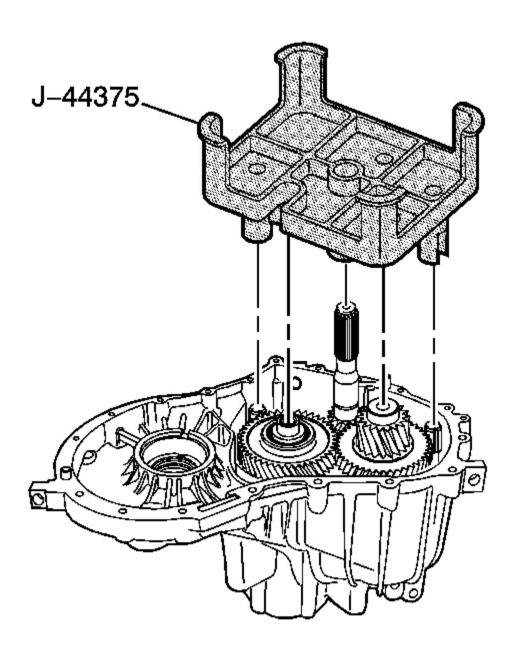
Gear Shafts, Shift Forks & J 44375 Courtesy of GENERAL MOTORS CORP.
